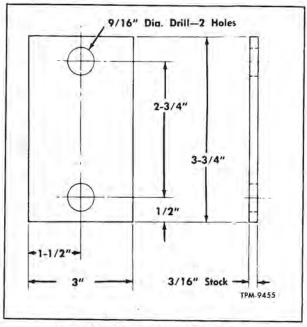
Closure Plates (For Placing Over Compressor Valve Ports)
